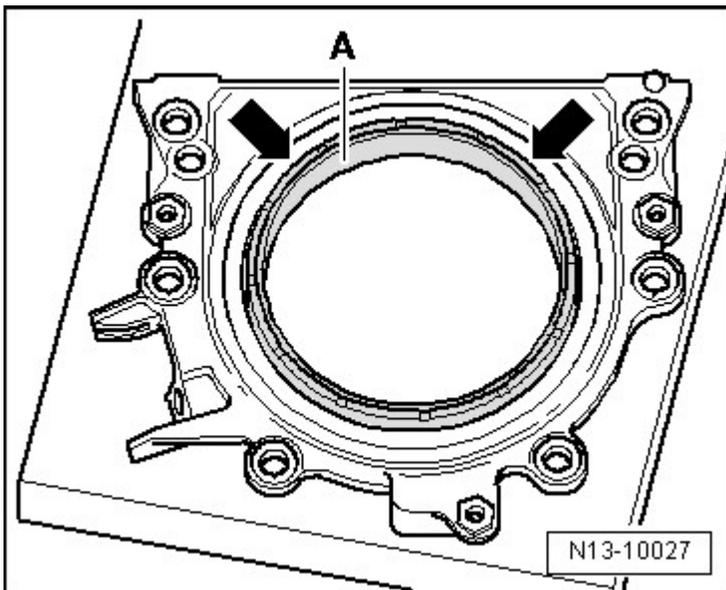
Identifying Sealing Lip Support Ring Pressed Until It Rests On Level Surface
